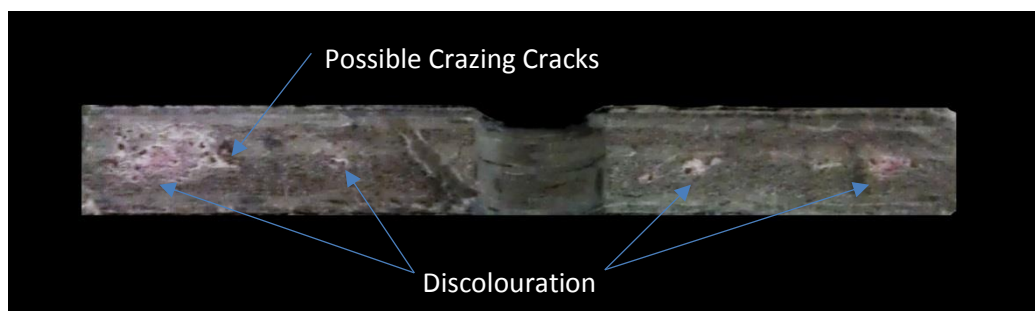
Discolouration and Possible Craze Cracks shown at the Cut Edges of a Pre-test Pin-bearing Strength Specimen after Hot-wet Conditioning at 50°C
